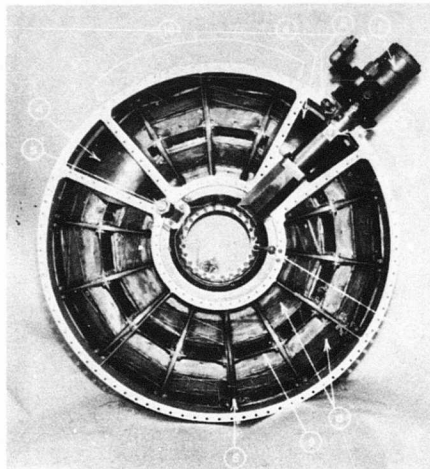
Cold Side (Front) of Rotary Regenerator: (1) Orbit Drive Motor, (2) Magnetic Speed Pickup, (3) Fitting for Drive Bearing Oil Line, (4) Sealing Tunnel, (5) Breather Connector, (6) Scavenge Tube, (7) Fitting for Rig Bearing Oil Line, (8) Matrix Packages, (9) Inner Tie Plate, (10) High-Pressure Area.
